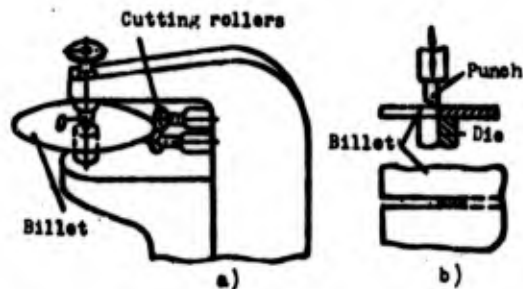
Diagram of the cutting of sheet metal. a) roller shears; b) vibration shears.
